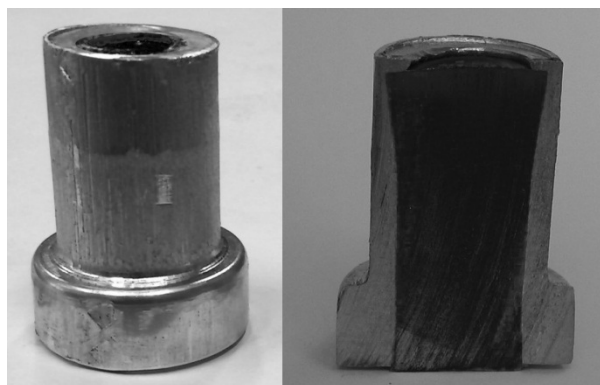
Billet composition after extrusion. Left: full billet, right: cross-section
